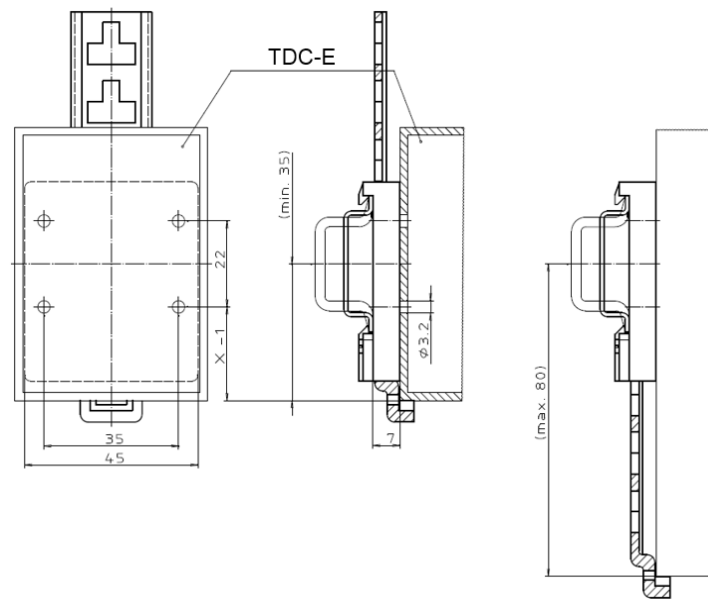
Mounting on a mounting rail – Mounting the TDC-E on the mounting rail bracket
